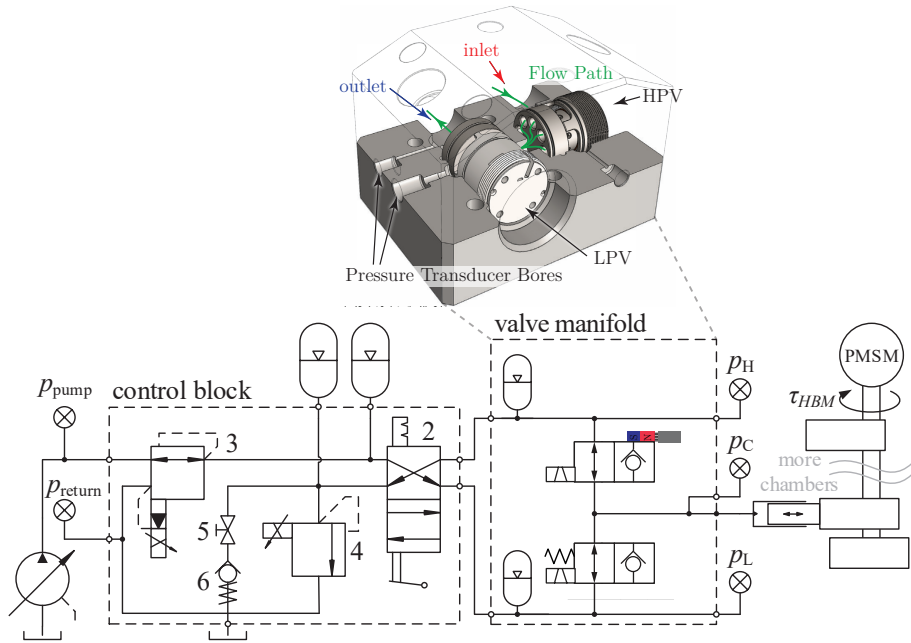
"CAD-drawing of valve manifold and simplified schematic of hydraulic layout used for both pressure/flow tests and DD operation tests". This figure is also published in Paper H.
